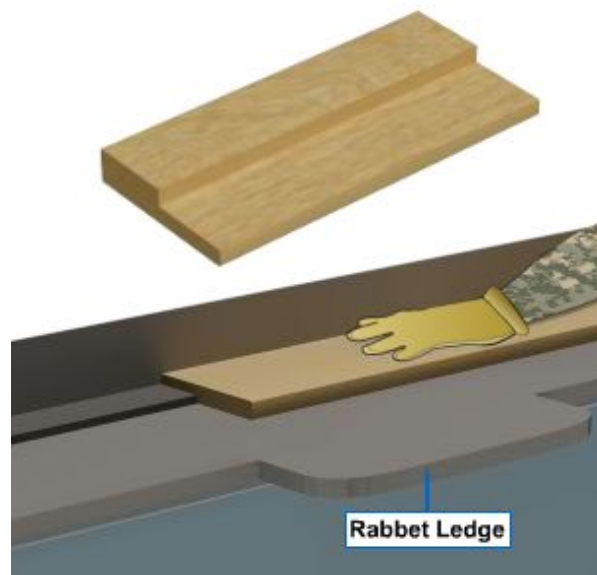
Rabbeting on a jointer with a rabbeting ledge.
